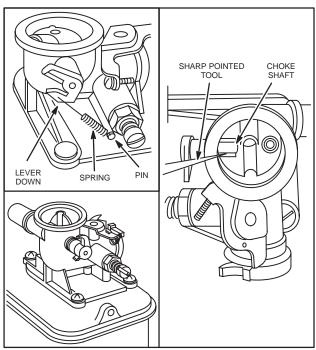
CHOKE SHAFT AND VALVE – CHOKE-A-MATIC®
